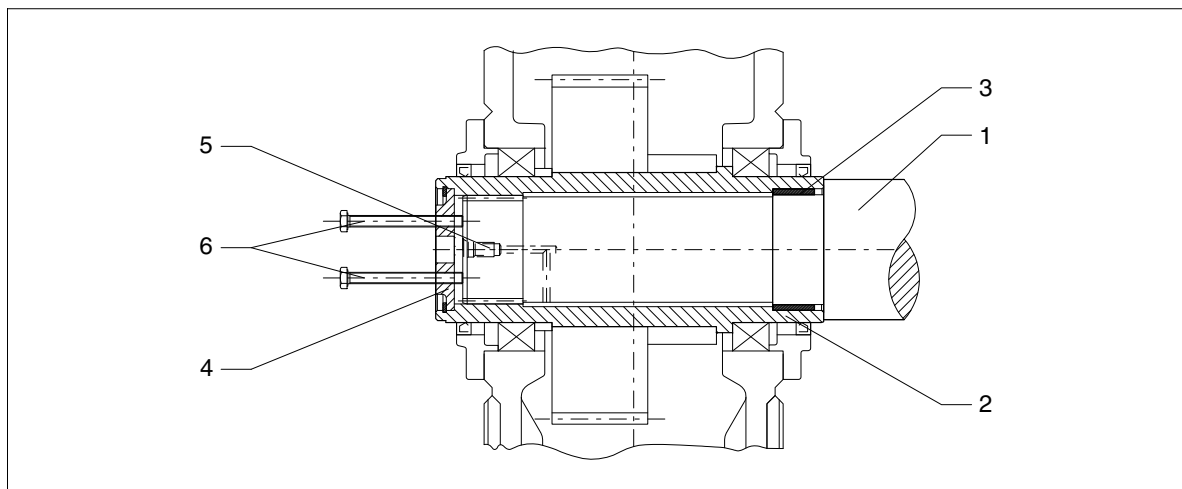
Hollow shaft with internal spline, demounting with end plate
